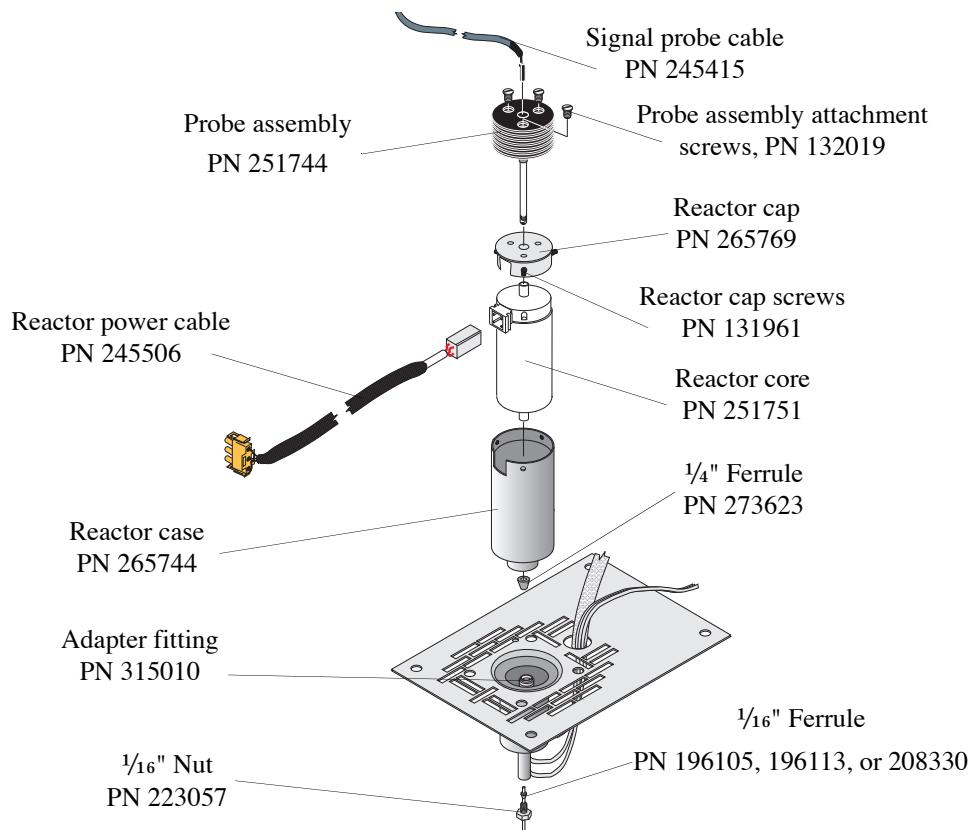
Model 5360 Heated XSD Detector Assembly
